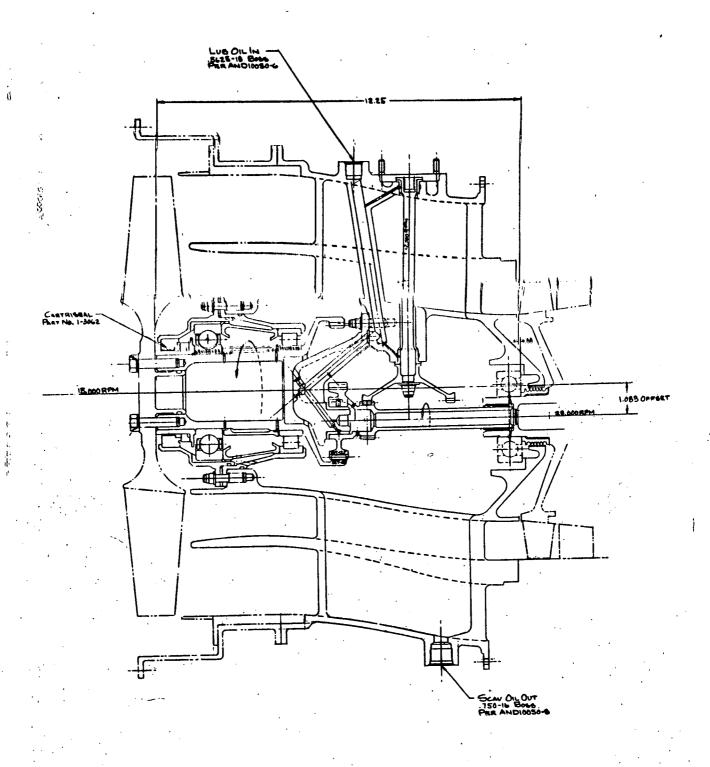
Internal-external arrangement—spur gears (accessories drive from high speed shaft).
